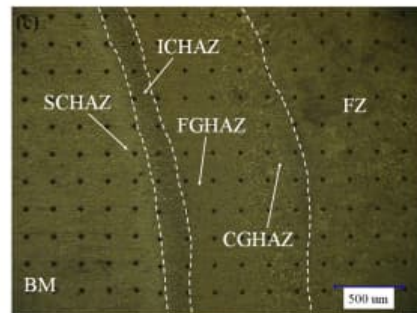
Different zones of a laser weld (Guo et al., 2015).
